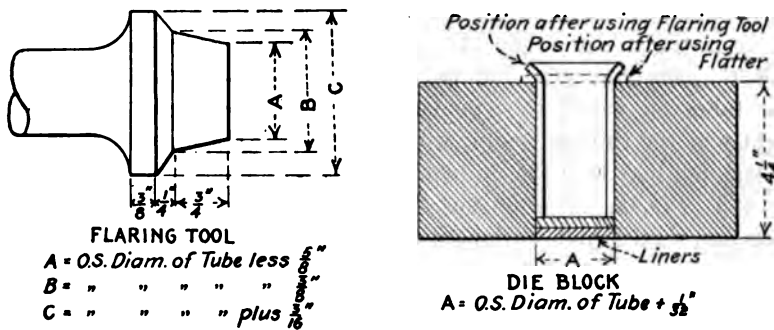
DETAILS OF FLARING TOOL AND DIE BLOCK REQUIRED FOR MAKING FLANGE TESTS OF BOILER TUBES
